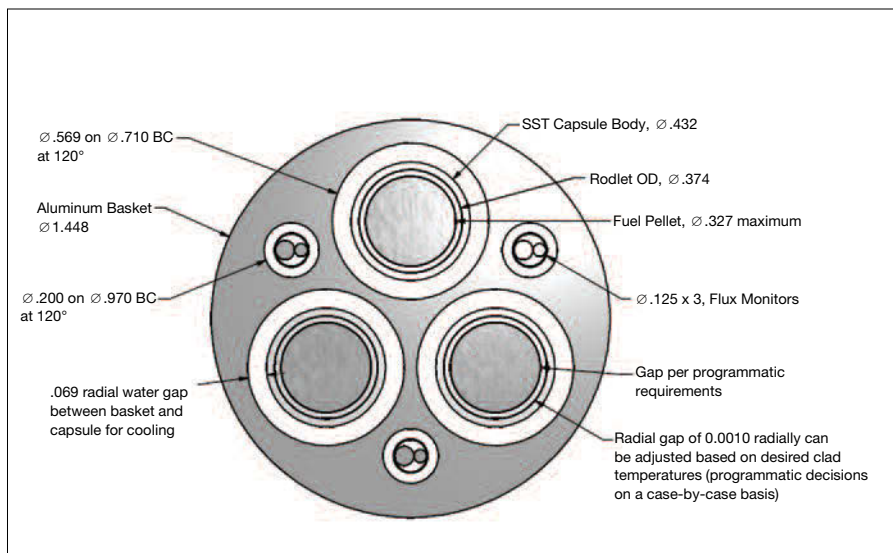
Cross section of existing basket assembly to be adapted for ATF-I; multiple capsules will be stacked in each radial capsule position (dimensions in inches).
